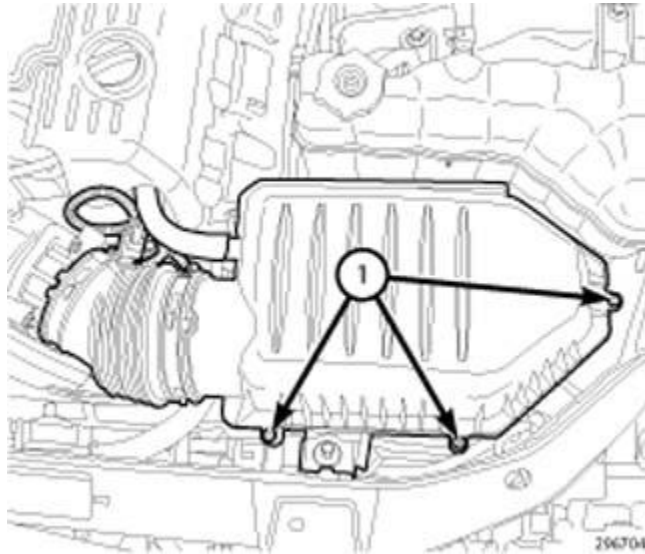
Air Cleaner Housing Cover Retaining Screws
